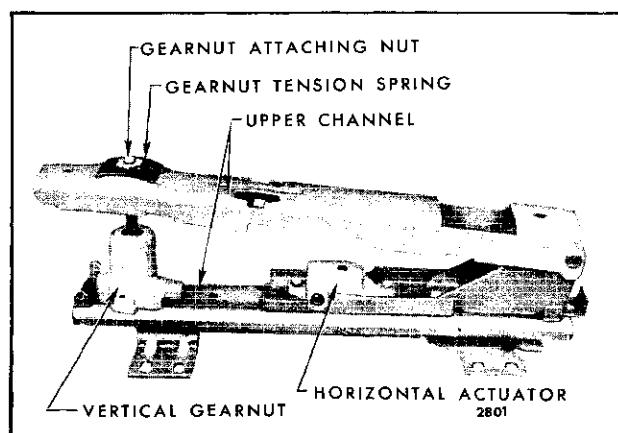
Four-Way Seat Adjuster - Buick "B, C & E" Styles
